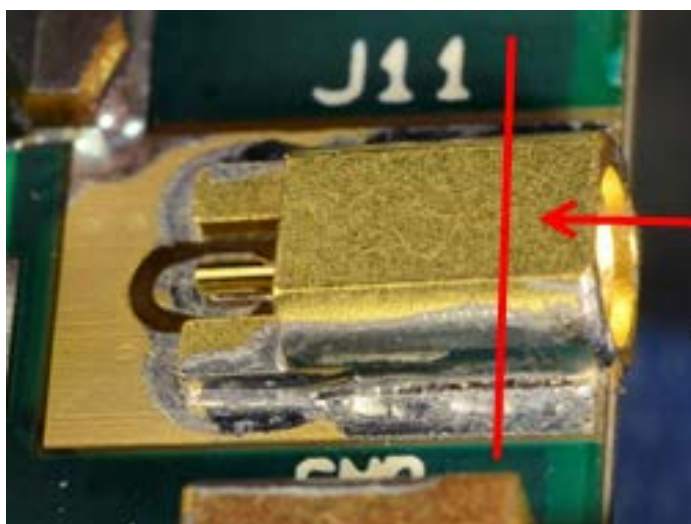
Soldered Surface Mount Connector with Joint Crack; Arrow Points to the Sectioning Plane. Close Up of Solder Section Attached to Circuit Board Pad (2200X).
